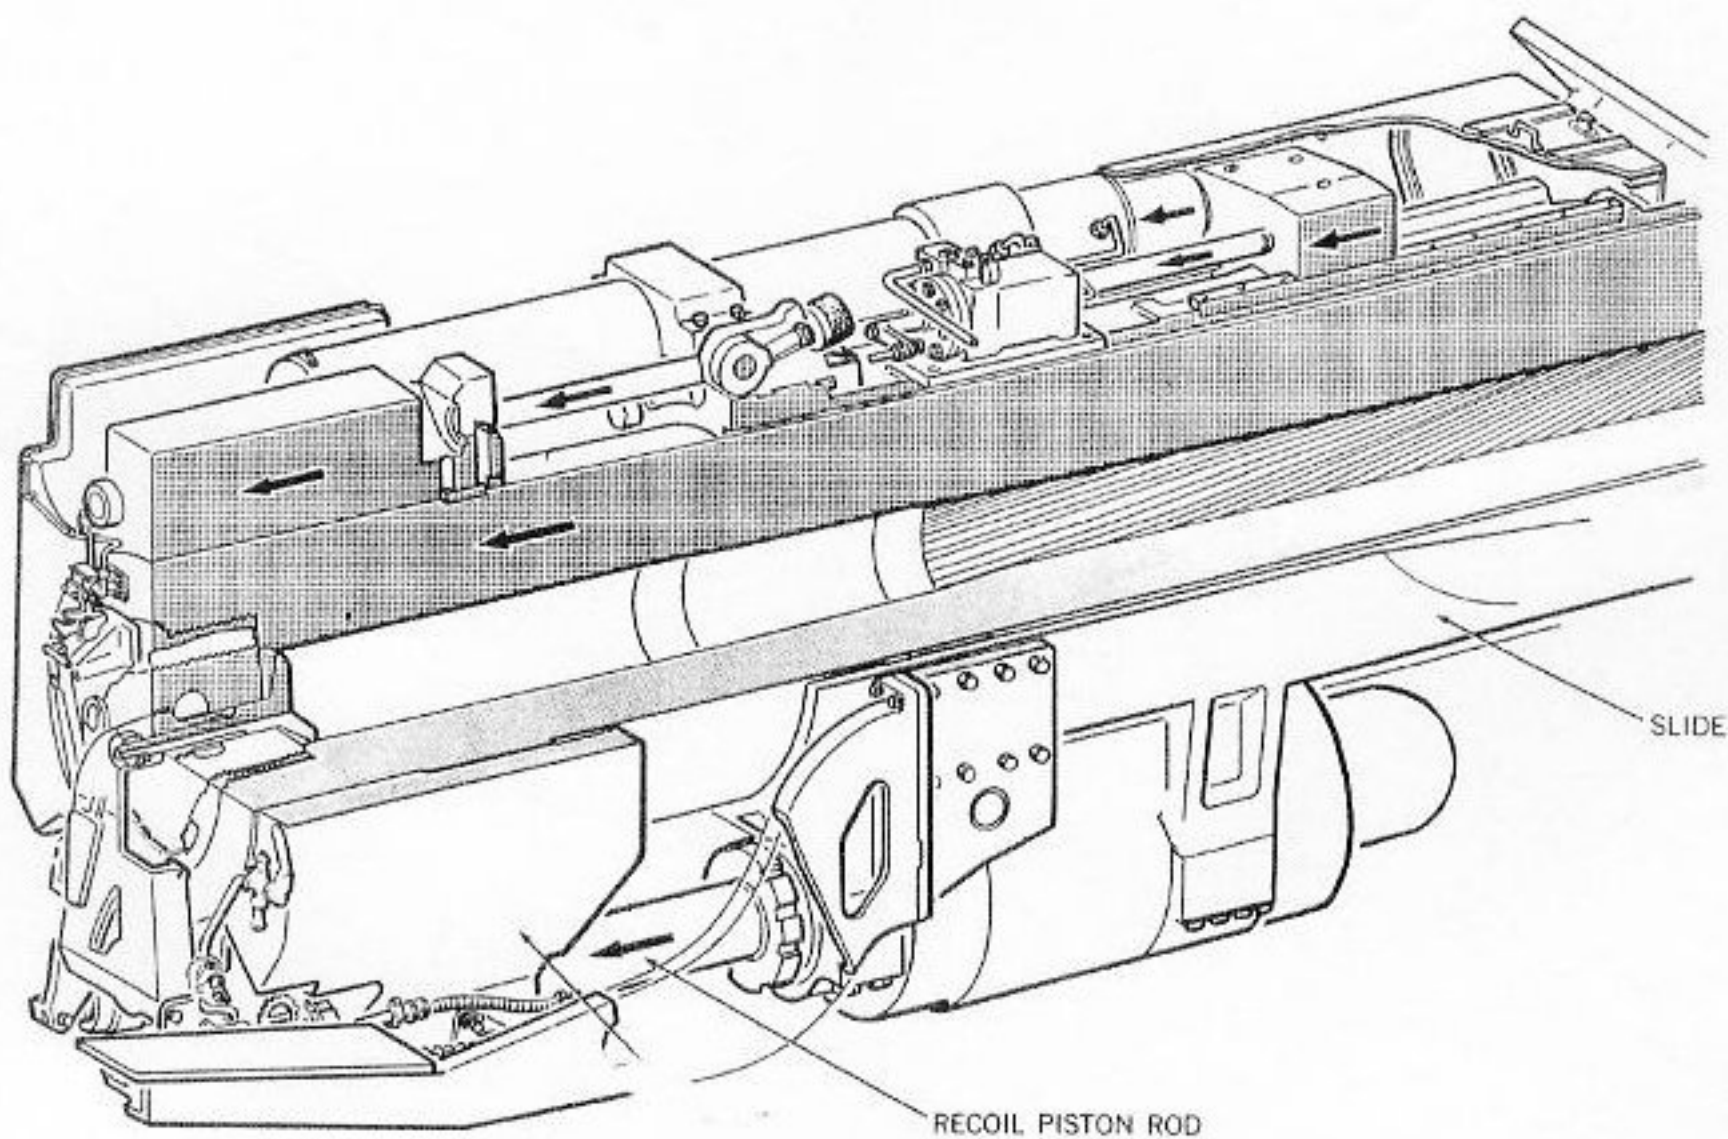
A. 16-inch Gun Assemblies. Firing Gun Recoiling.
